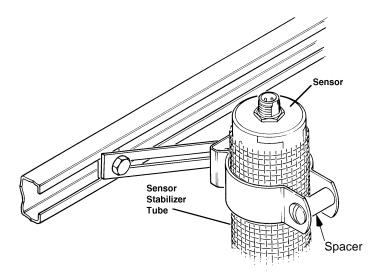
Mounting the Sensor with the Sensor Stabilizer Tube.
